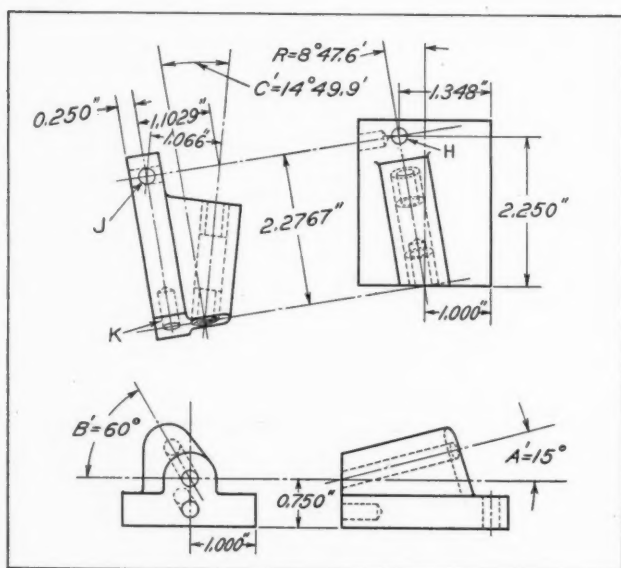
Compound-angle Hole in This Bracket is Readily Machined and Checked for Angularity and Location when Three Construction Pin Holes are Utilized
